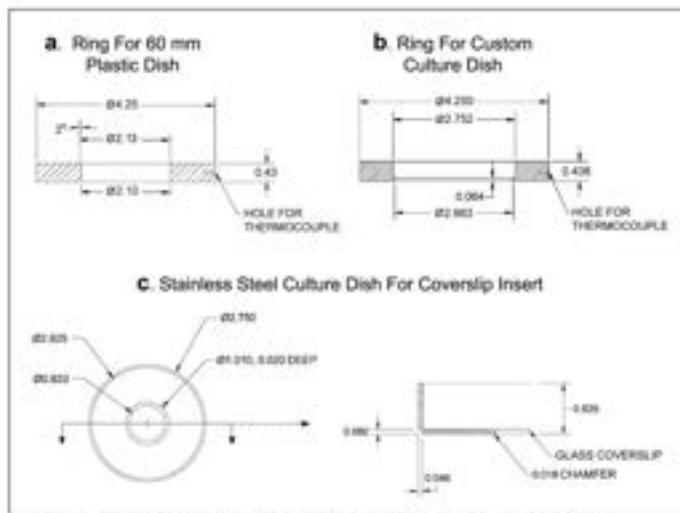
Drawings of the custom machined metal parts (all dimensions are in inches).
